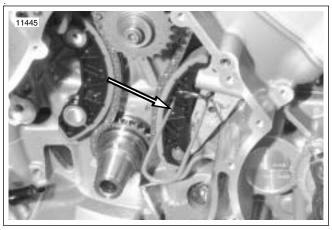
Primary Chain Tensioner Retainer (HD-45326)
